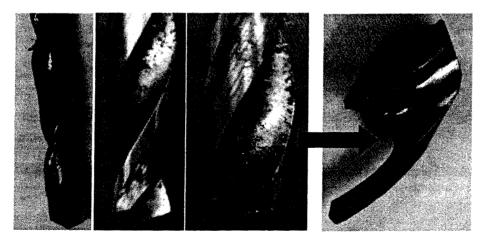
Adhesion of carbon fiber dust to TiN covered WC-Co drills. Tool wear and tool break-down after drill dulling.
